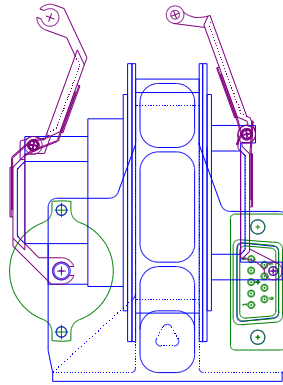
Pinpuller mounting side view. Only the near half of the sensor is shown. The sensor doors are drawn both opened and closed.
